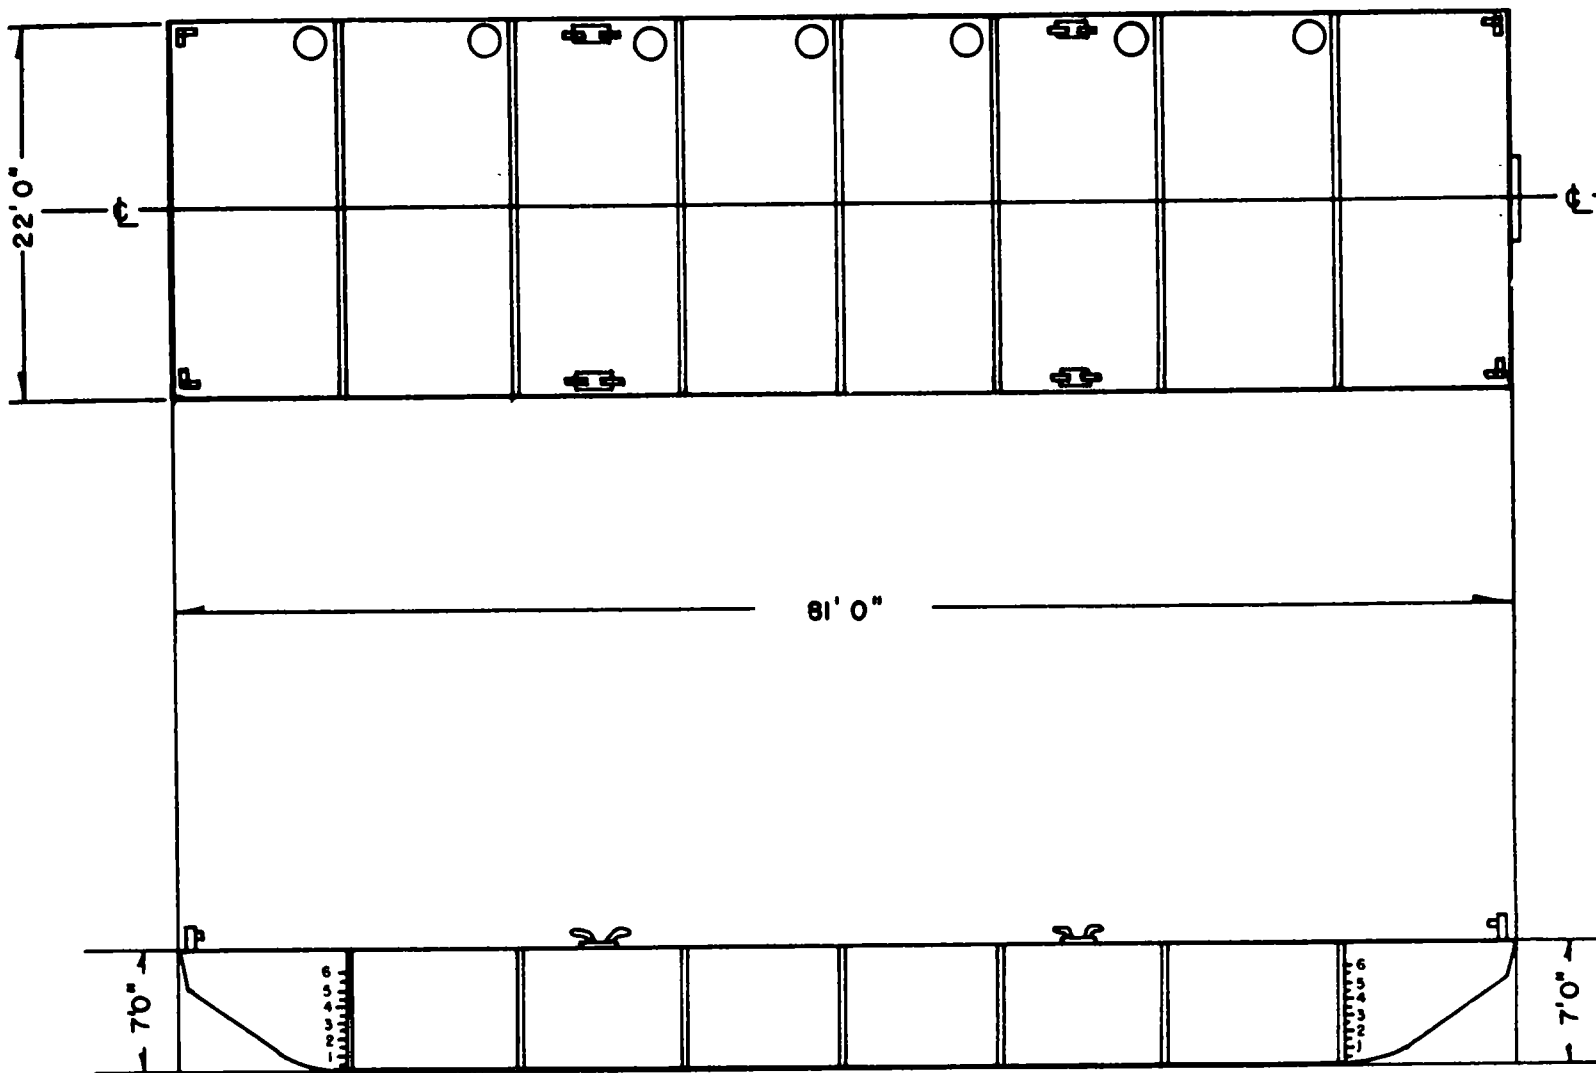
Barge, deck cargo, nonpropelled, steel, 130 tons, 81 feet, sectionalized, nesting, design 7001.
